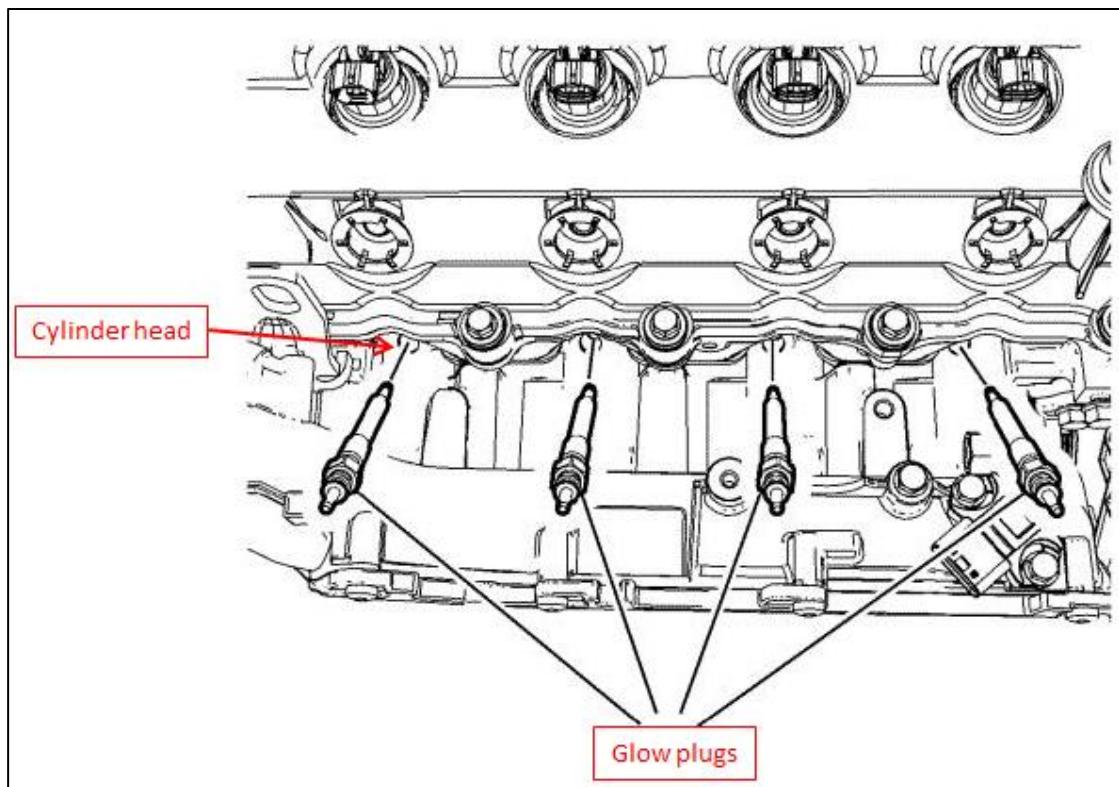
Position of the glow plug on a DI diesel engine, the glow plug is inserted into the cylinder head
